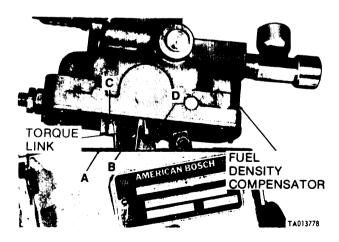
Assembling fuel density compensator fuel stop plates (Code A pumps).
